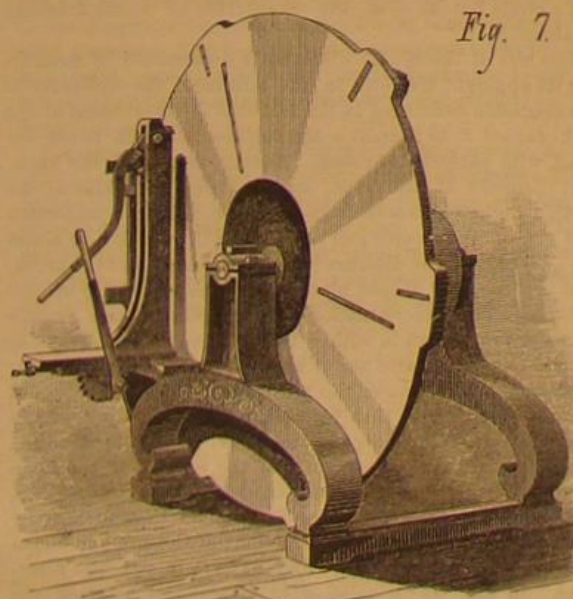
BARREL HEAD DRESSING AND JOINTING MACHINE.
